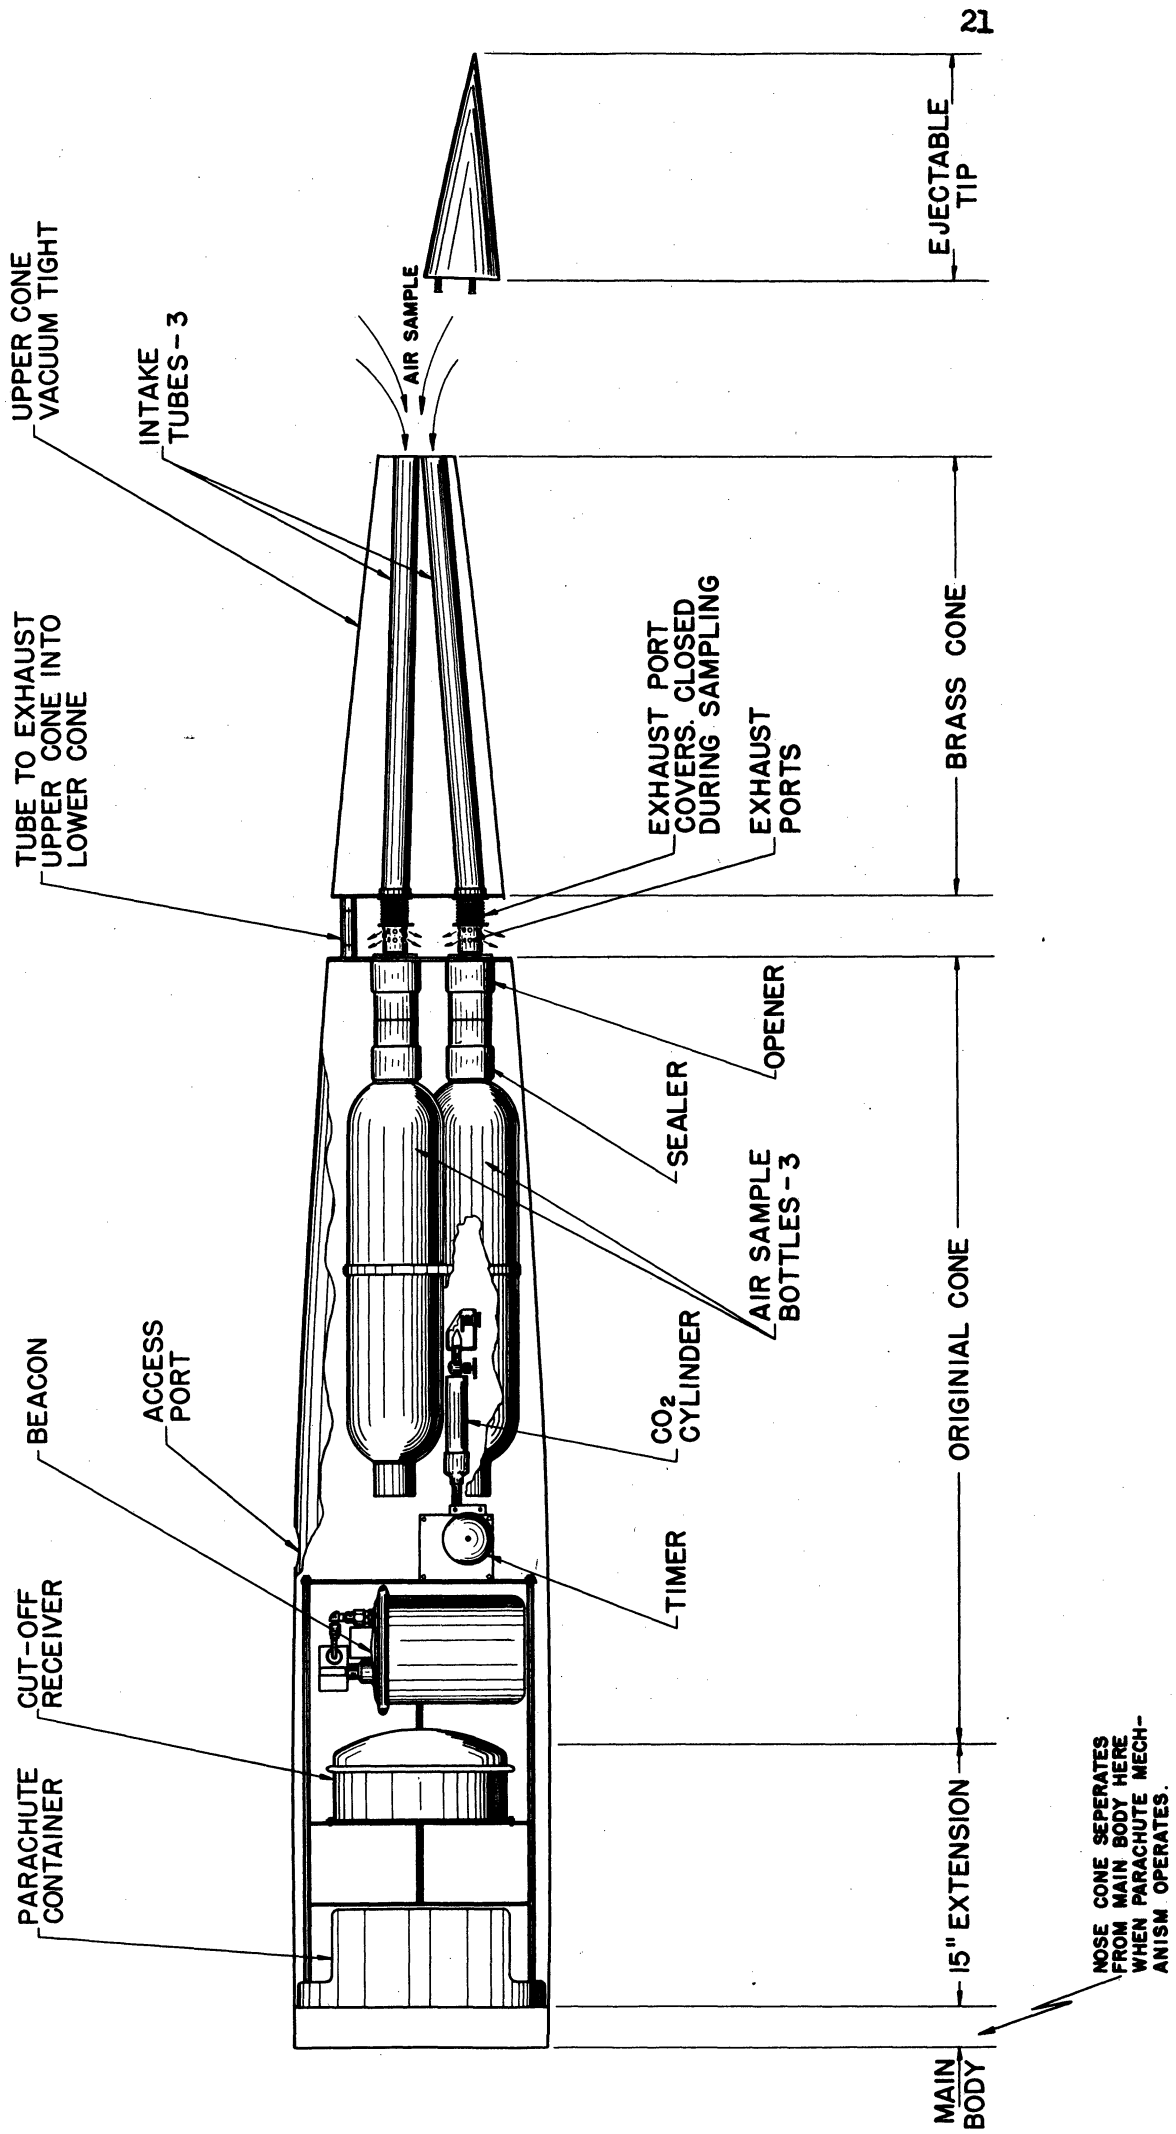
Schematic of Sampling Bottle Installation Used on SC-11
